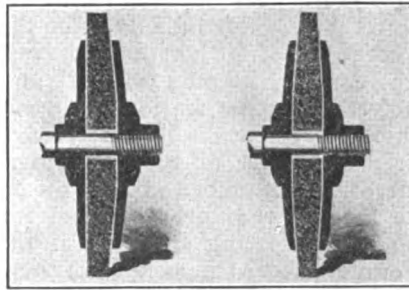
FLANGES OF WIDE DIAMETER WILL ALSO SAFEGUARD THE GRINDING WHEEL
